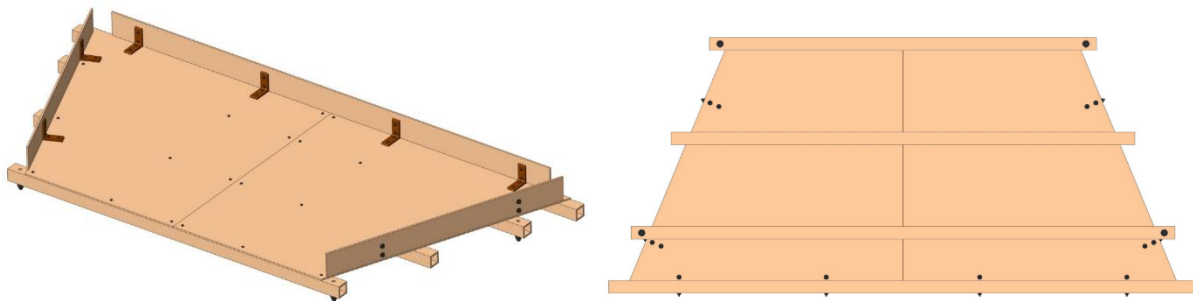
The final draft of the CAD assembly model for the Inner Platform.
